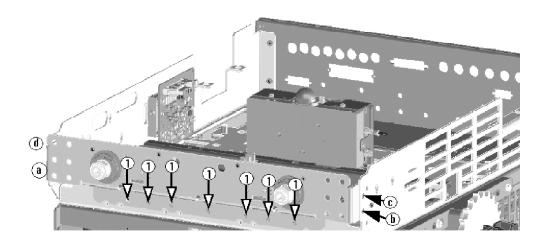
Test Set Front Plate Assembly Installation (0515-0372, 0515-1227)
